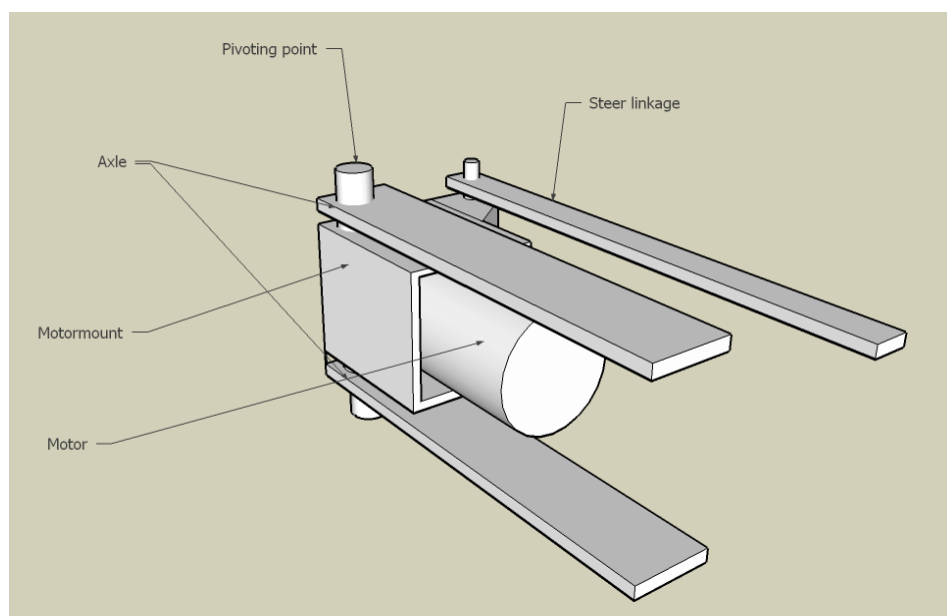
A very simplified version of our motor mount. The motor mount is supported by two pieces of metal, from above and below. The axle of the motor is in the center of the motor, so the pivoting point had to be moved slightly to the side.
